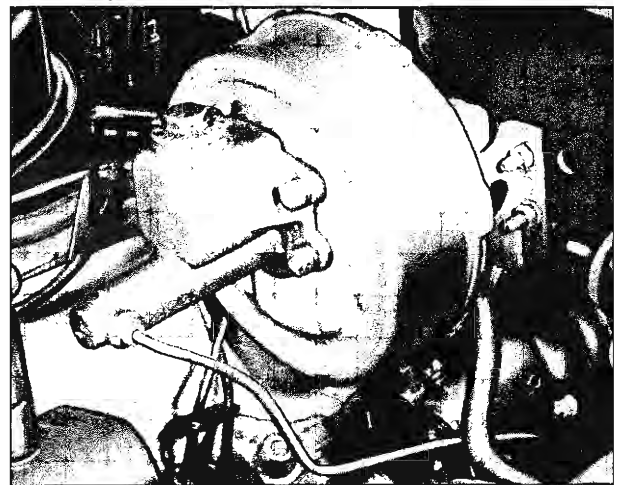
Power Brake to Dash Mounting (Moraine Unit Shown)
